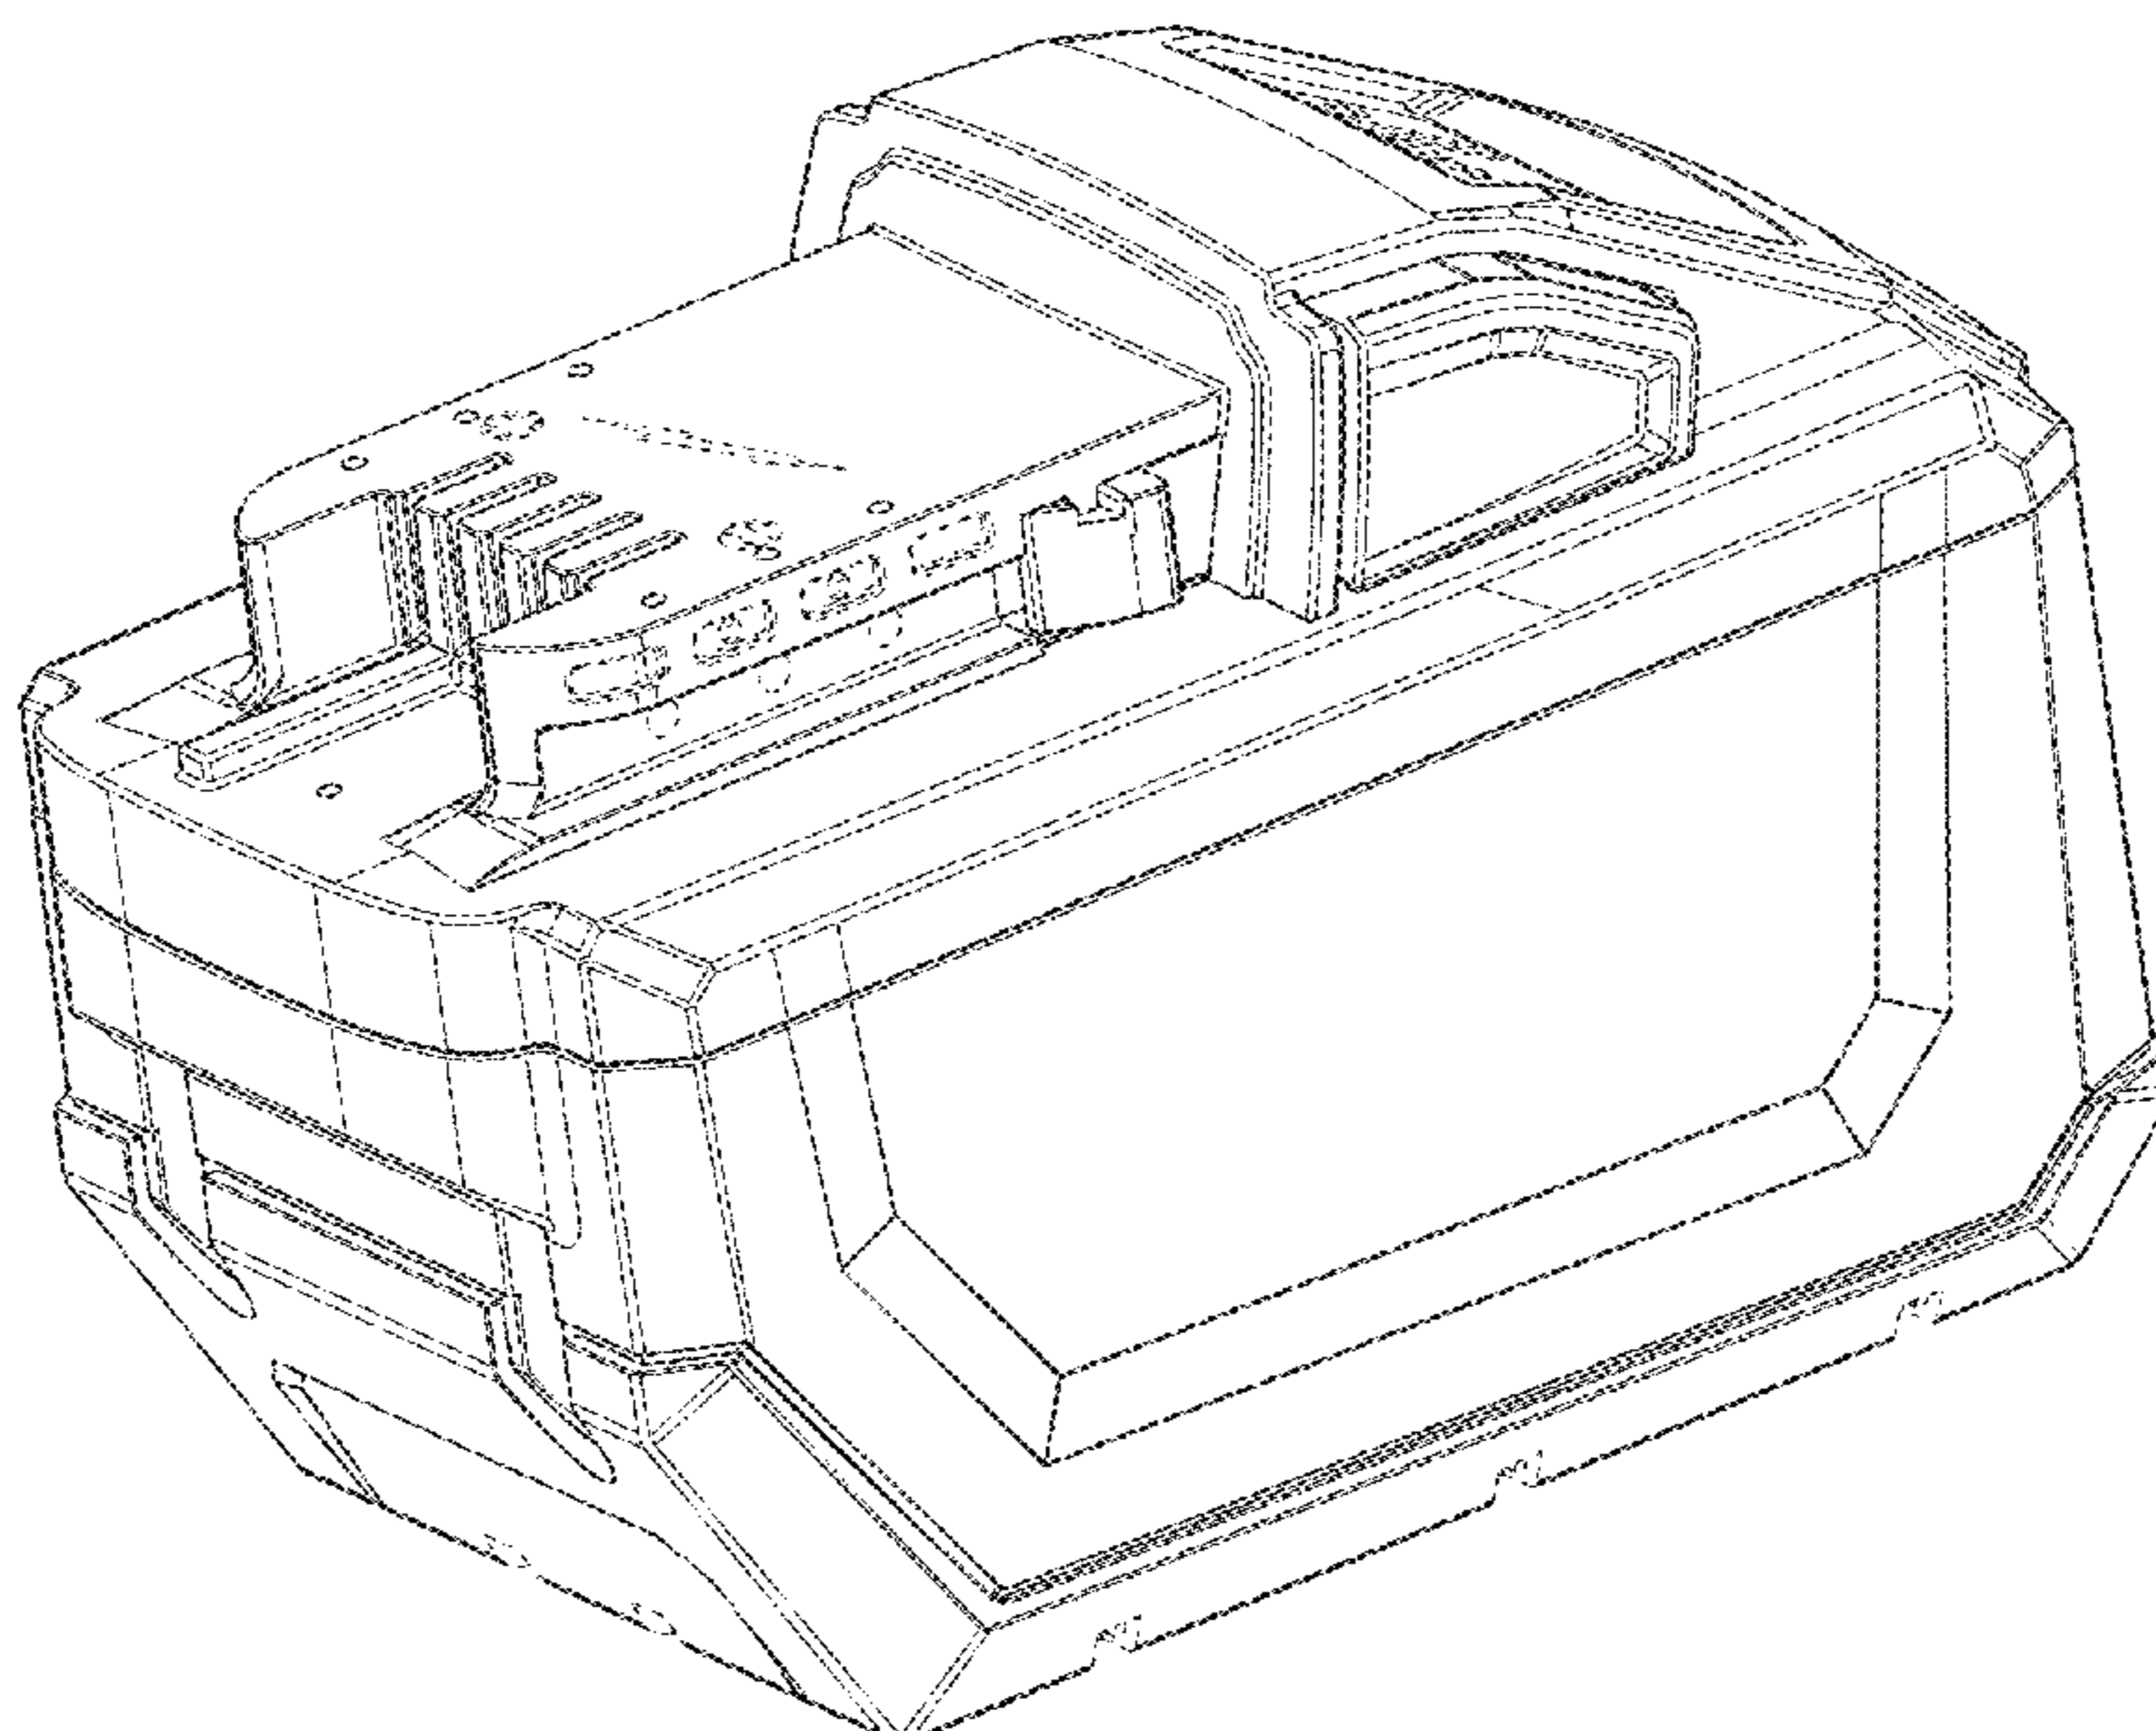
is a front view of the battery pack shown in FIG. 1.
